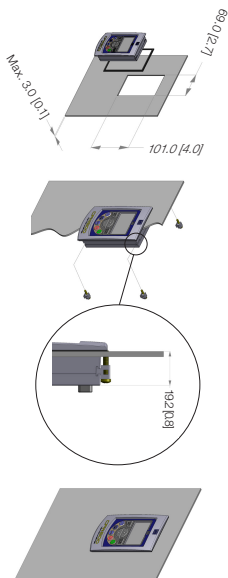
CFW500-HMIR dimensions in mm [in] and panel mounting
